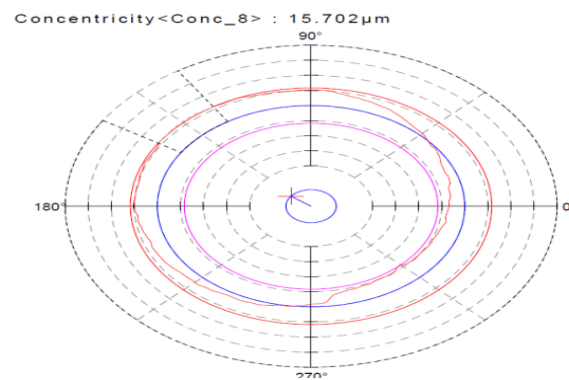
Concentricity measurement between ID and OD of resonator using Roundness Tester.
